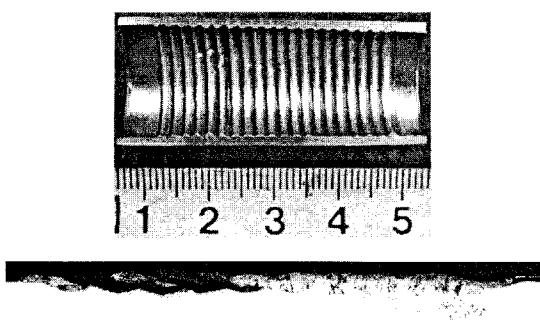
Bead shapes of multi-pass laser cladding for inner tubes
